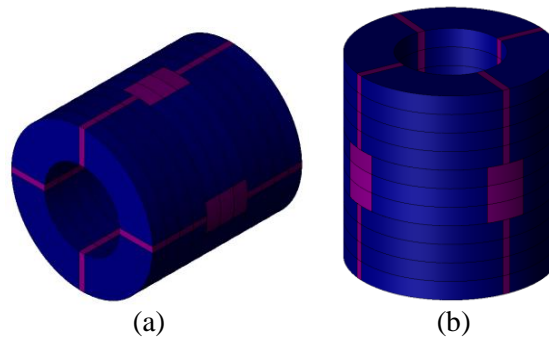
Rotor Pole Axial Pairing model a) Isometric view b) Rotor top view
